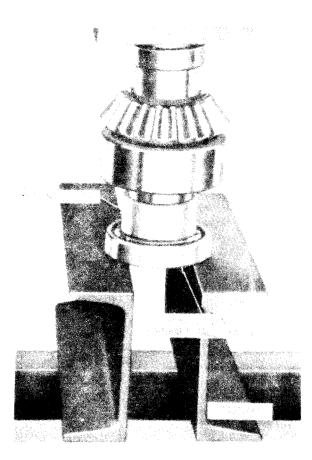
Pressing fan driven gearshaft into upper gearshaft ball bearing.
